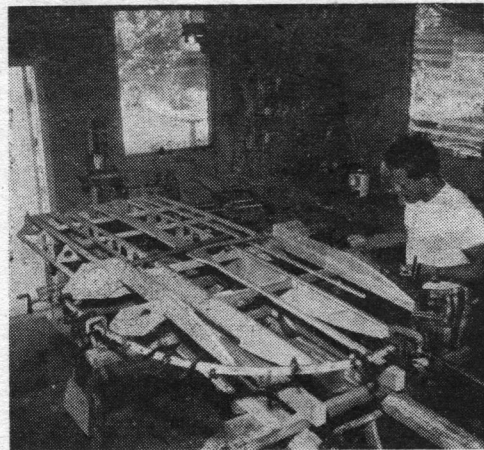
Here framing is complete except for sponson chines. Clearly seen are 2x4's that make up the building jig. Note heavy pine clamps holding the bow.
